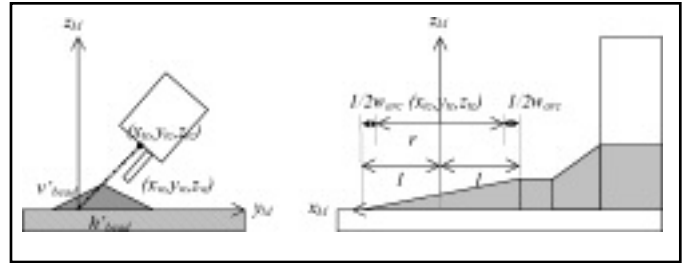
Bead model after fillet end in open fillet welding.
